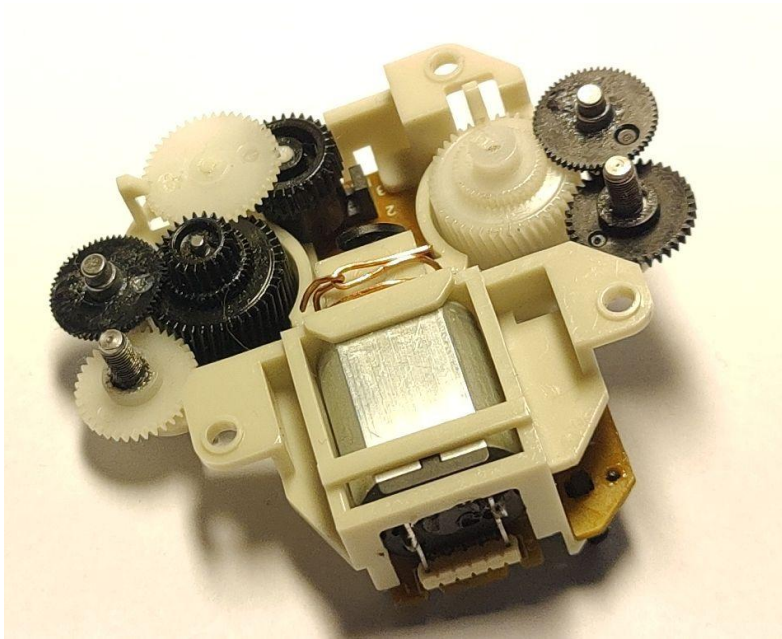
Dynamic Drum gearbox with all gears in their correct locations. (Gear screws screwed off from Video Drum and placed to gear box.)
